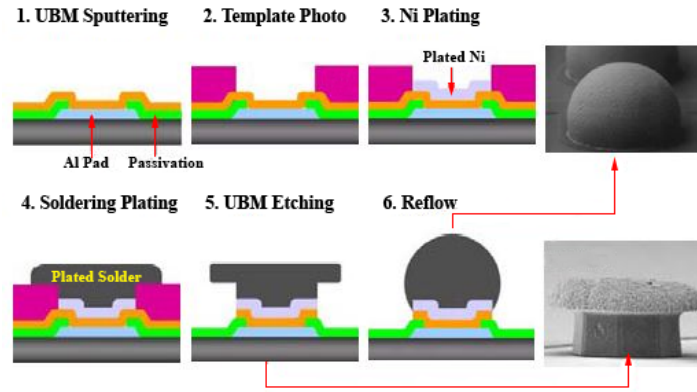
fabrication process of solder bump by micro-C4 technology [9]
